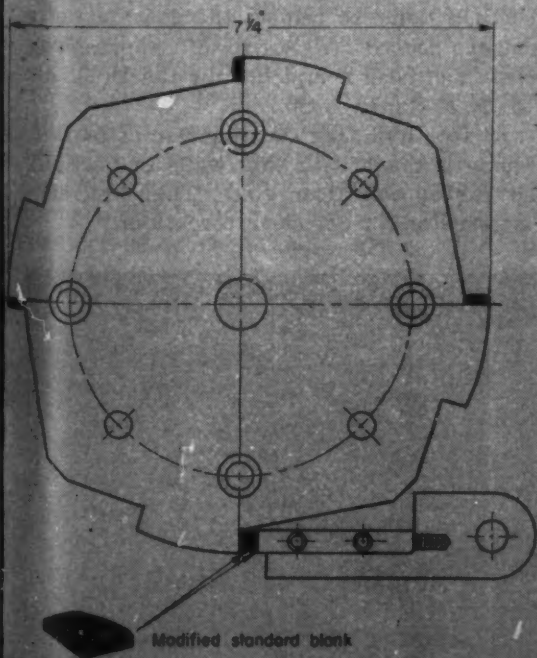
Left—Redesign solution to the problem of wear and subsequent inaccuracy of operation in this index plate was to provide cemented carbide pads at the indexing surfaces. While former plates often wore out in two or three weeks, the new design has required no attention in the first year of operation
